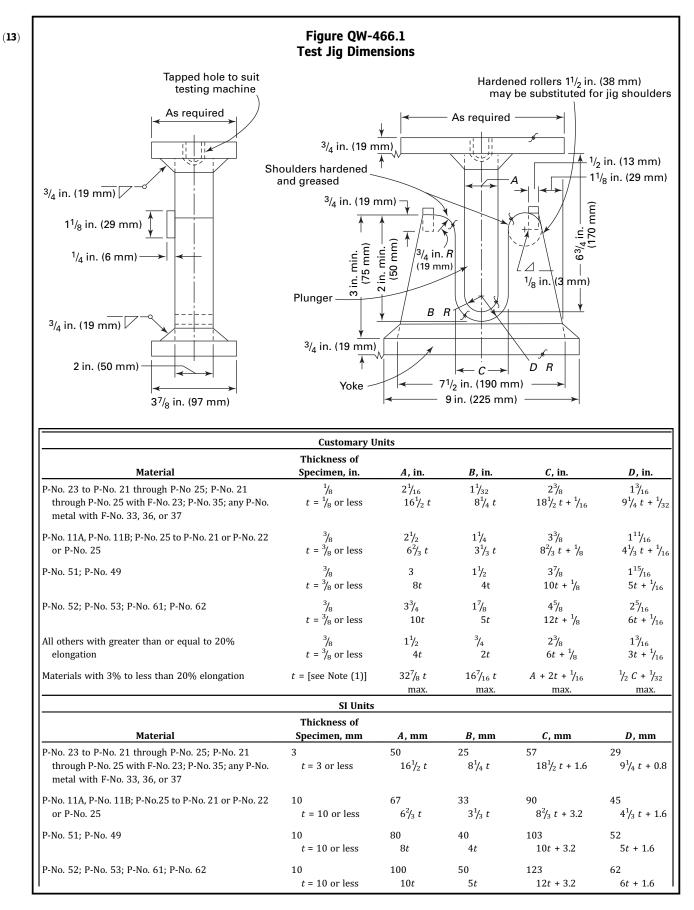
Test Jig Dimensions (Cont'd)
